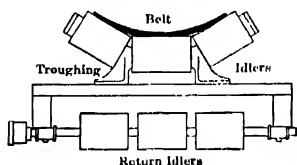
Arrangement of Pulleys—Belt Conveyor.
